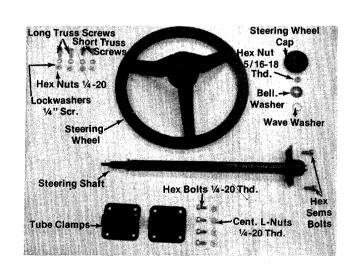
PARTS IN CARTON AND HARDWARE PACK
